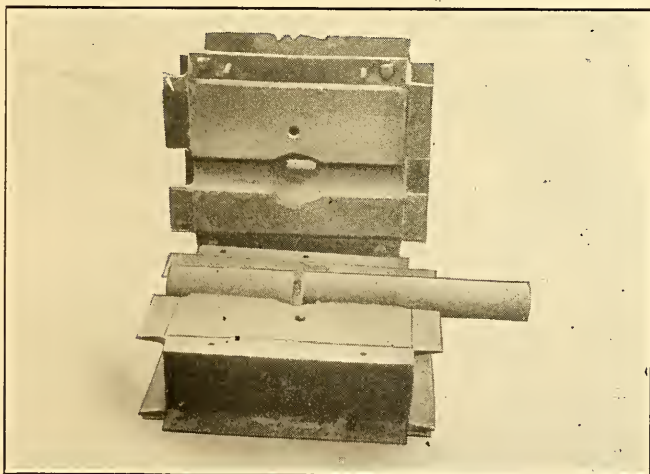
Machinery Steel and High-Speed Steel Ready to Clamp Mold.
